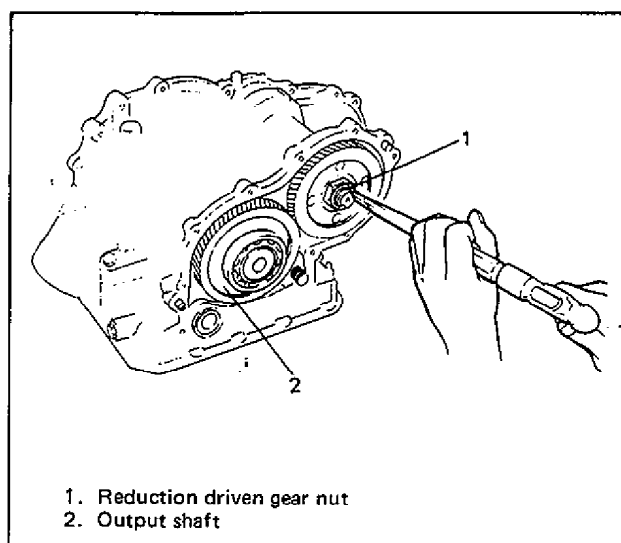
B-118 Uncaulking Reduction Driven Gear Nut
